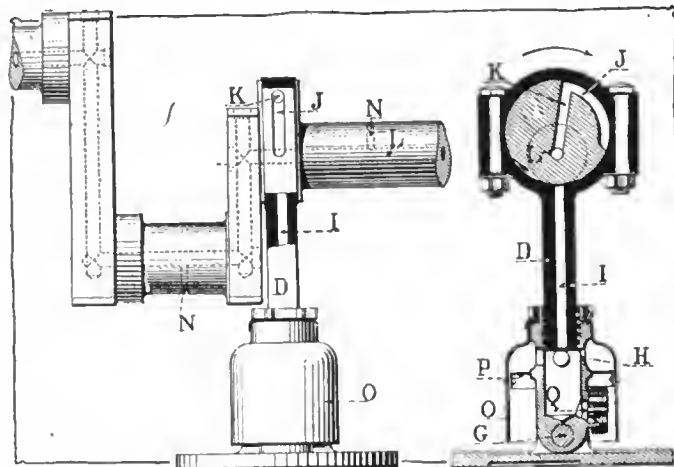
Oil pump in crankcase of Hotchkiss 18-hp motor
